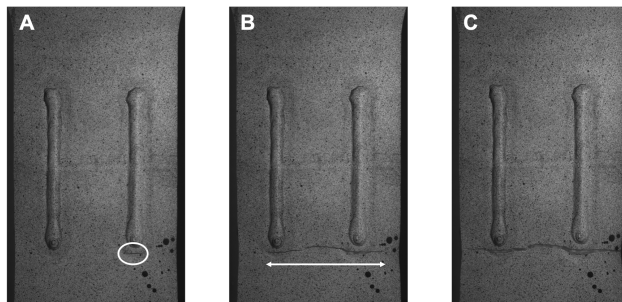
Fracture of specimen with cross weld speed 20 mm/s, with PWHT.
